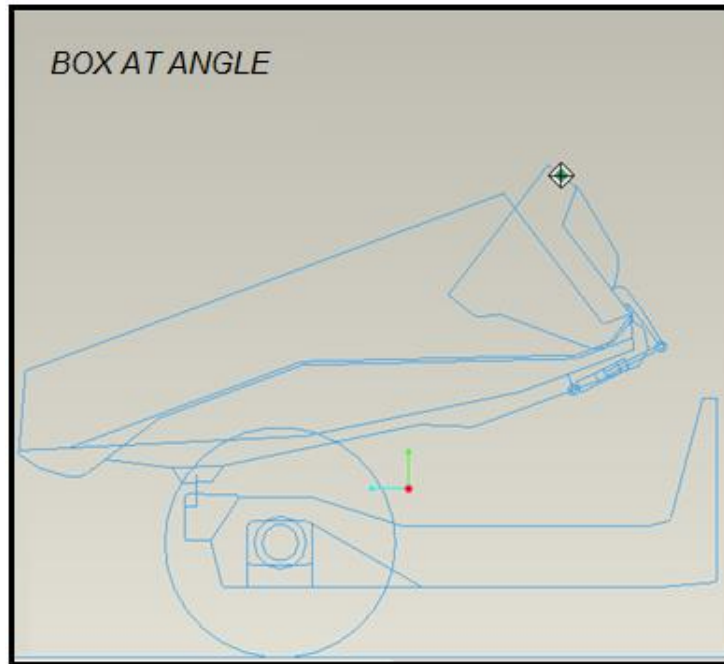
In this figure, the front section is being folded and the cylinder starts expanding.
